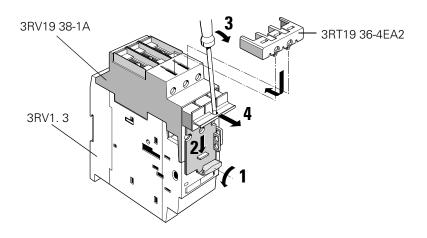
Locking the disconnecting module and mounting the cover (frame size S2)
